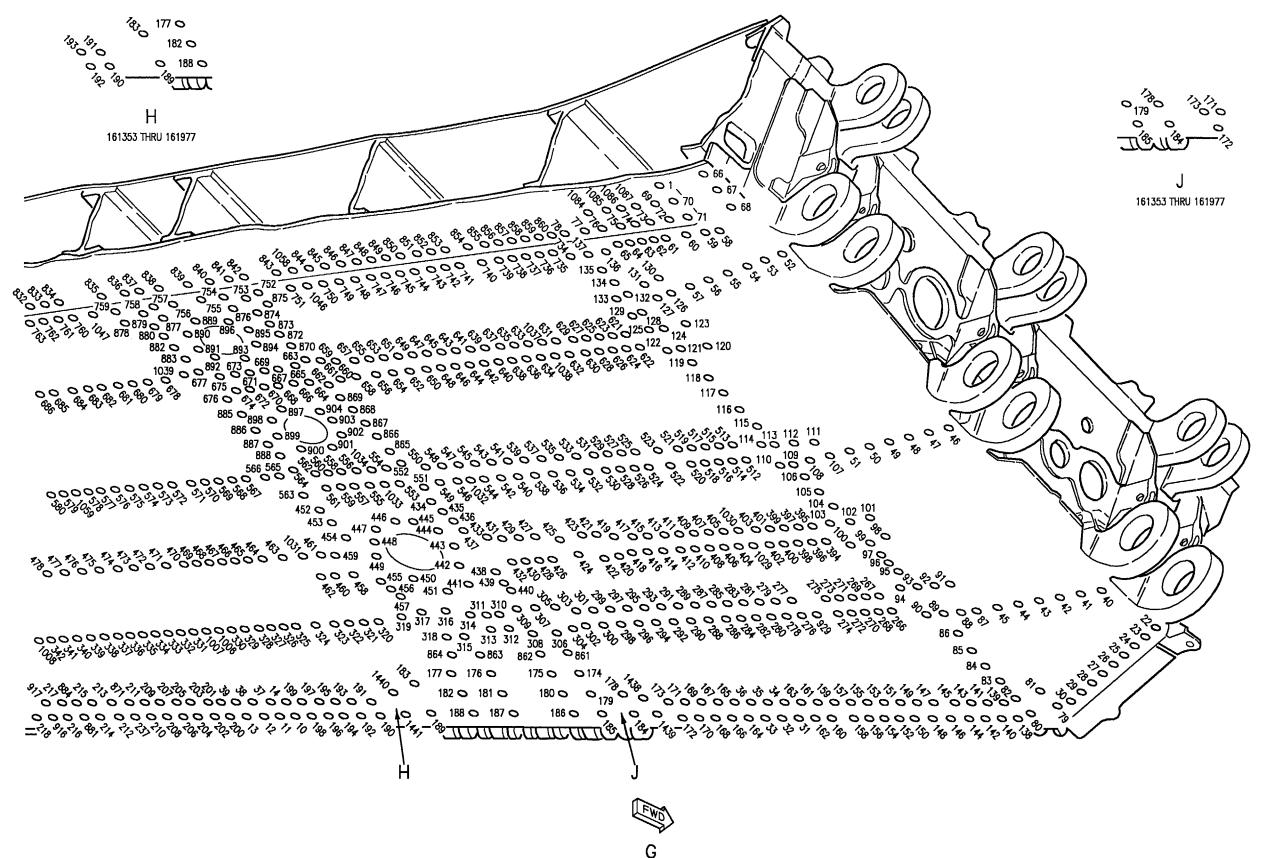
Inner Wing Skins Hole Numbers (Sheet 5)
